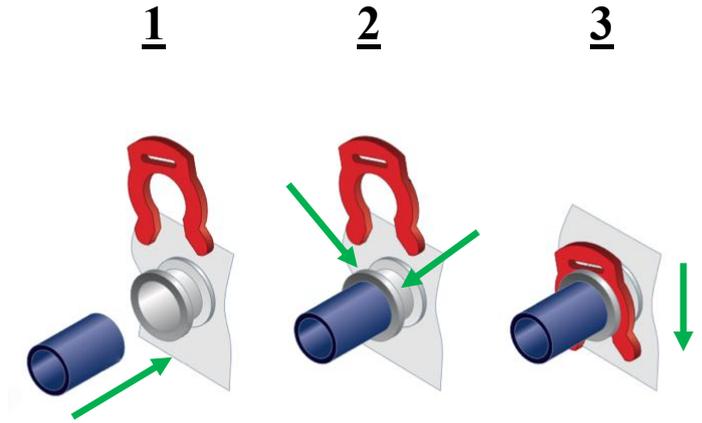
Connecting tubes and closing plugs to quick-release fittings on the Device casing.
